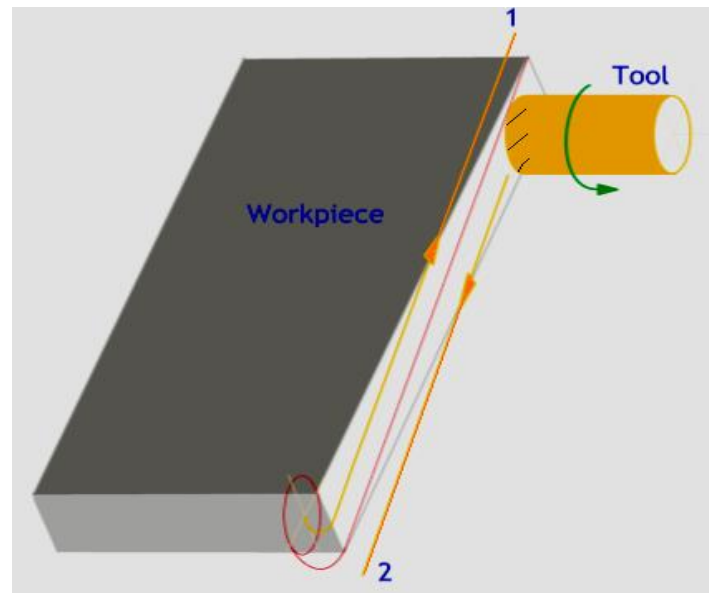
Trajectory of milling tool (Cutter) on the milling
